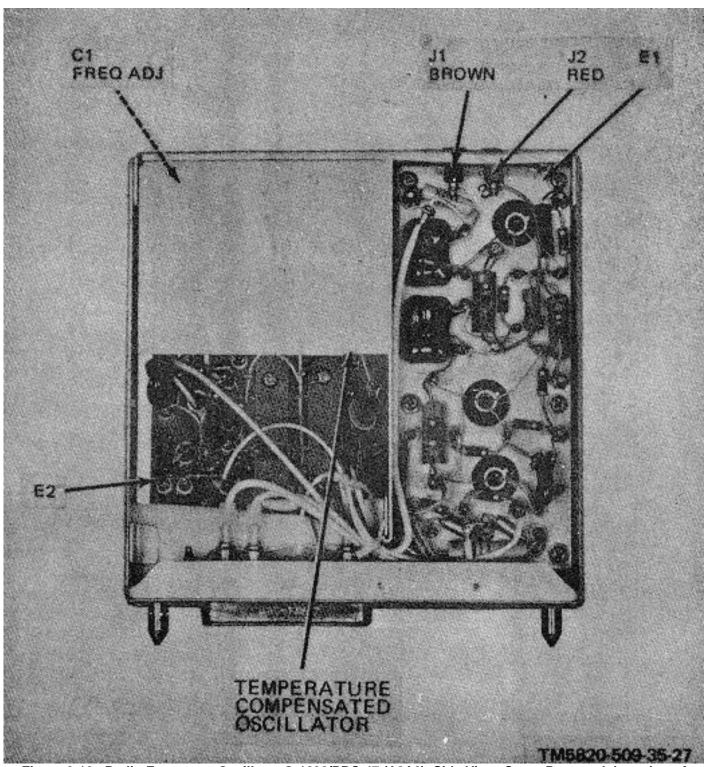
Radio Frequency Oscillator O-1032/PRC-47 (A8A6), Side View, Cover Removed, Location of Subassemblies E1 and E2, and Test Points.
